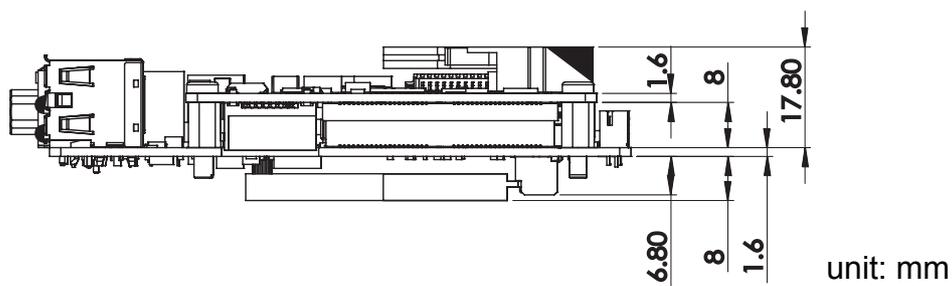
MIO-6300 Mechanical Drawing (Side View)
